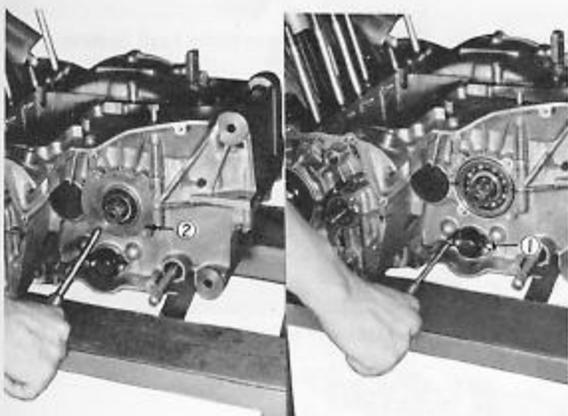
Removing gear shifting switch and oil seal retainer
